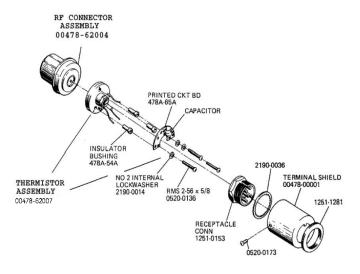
478A Option H72 Thermistor Mount Assembly
